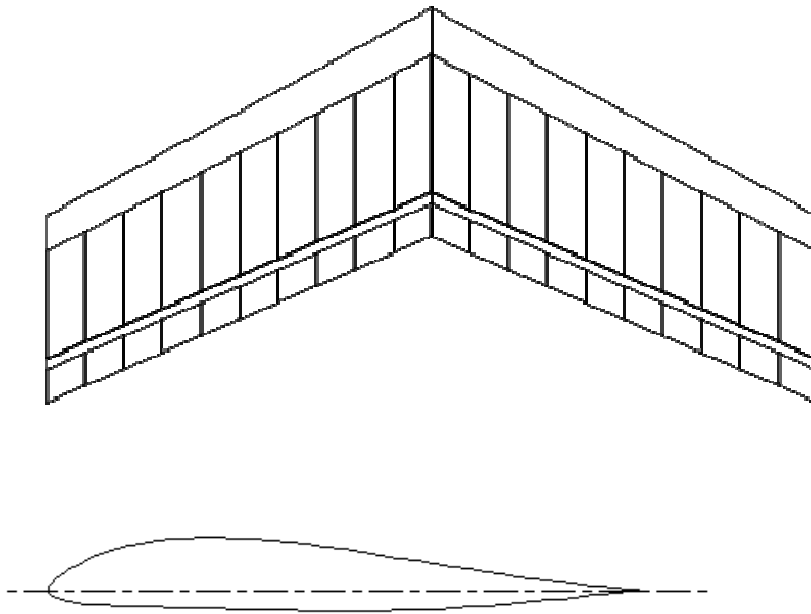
Plan view of prototype and cross section of EH 3.0/12
